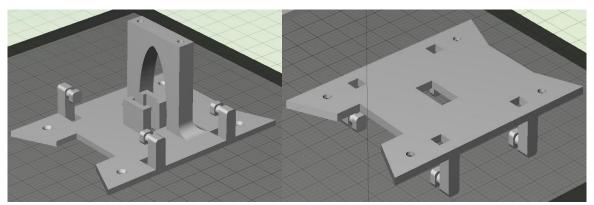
TOP AND BOTTOM MOUNTING PLATES
